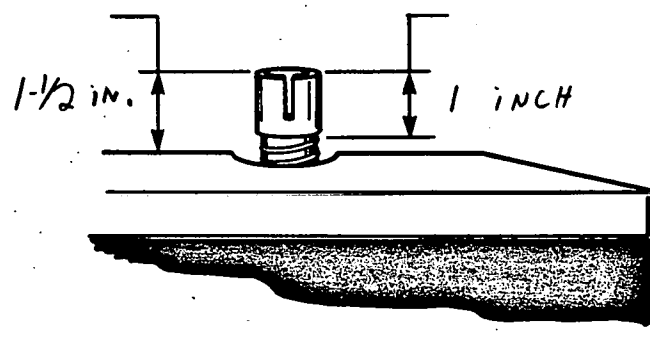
CORRECT EXHAUST Tube ADJUSTMENT
